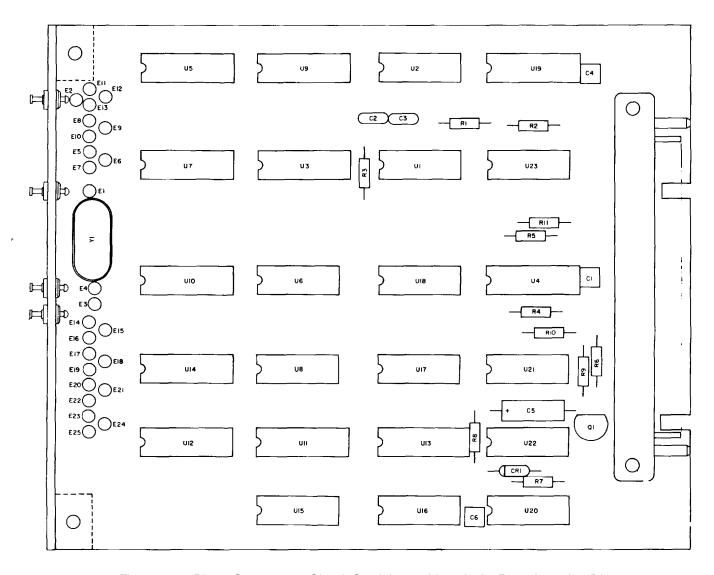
PhaseComparator Circuit Card Assembly, 1A3A2 Parts Location Diagram
